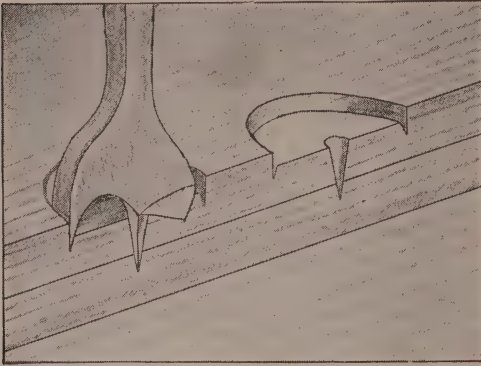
Boring with Centre Bit : First Operation, shown partly in section
